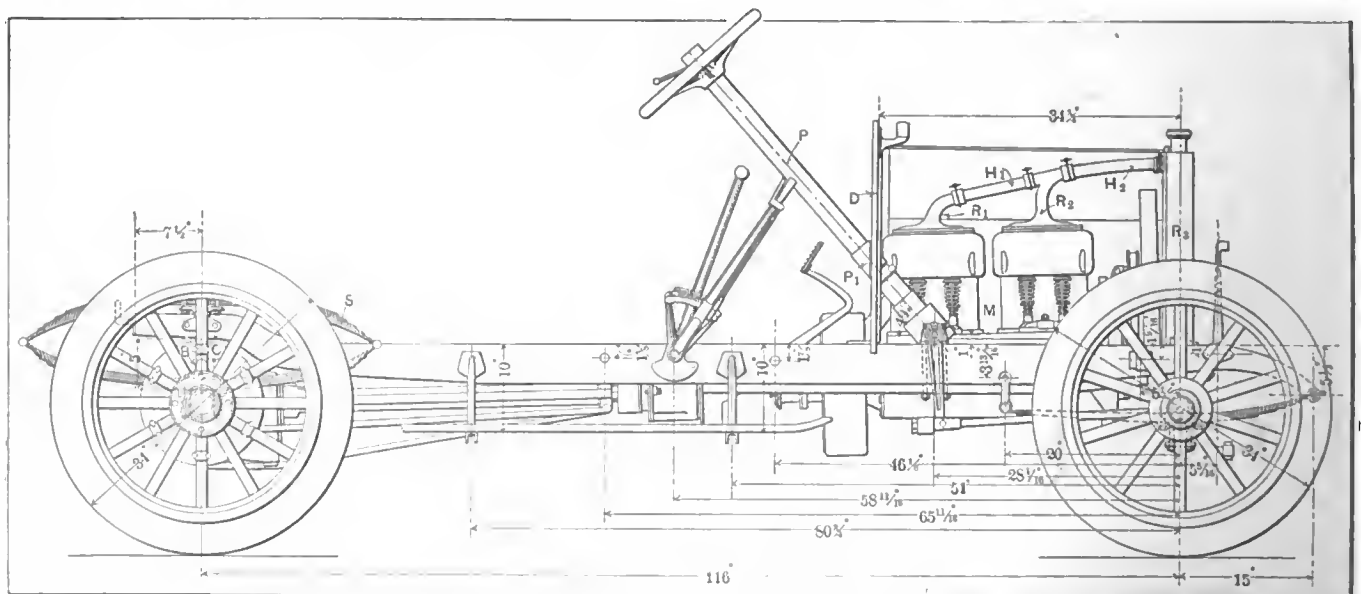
Side elevation of chassis, showing position of motor, radiator on center line of front axle and drop frame suspended on full elliptic rear, and semi-elliptic front springs
